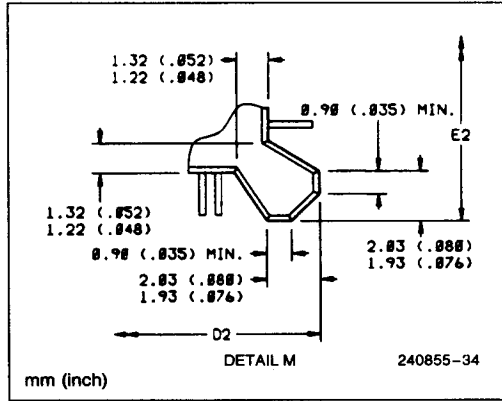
132-Lead PQFP Mechanical Package Detail—Protective Bumper
